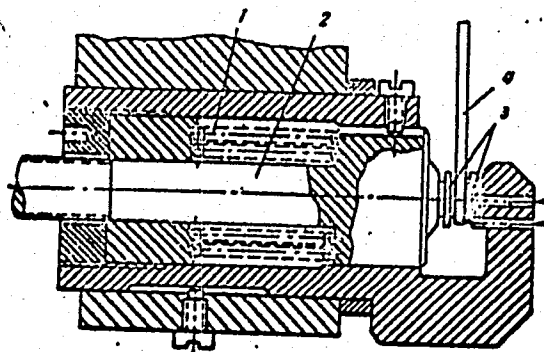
Schematic illustration of loading device. 1 - calibrated loading spring, 2 - spring-load transmitting rod, 3 - test specimens, 4 - friction disk
